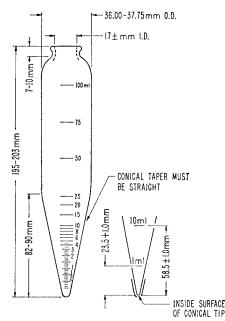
ASTM 8-IN. CENTRIFUGE TUBE
